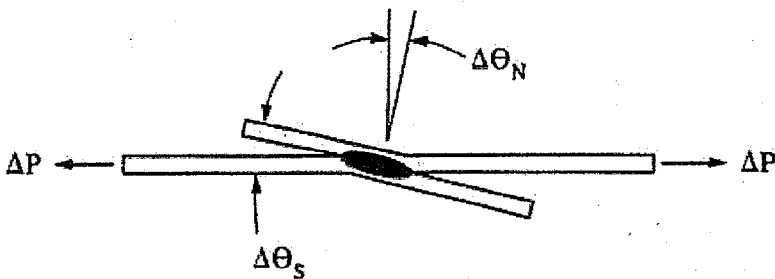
Side view of a spot-weld connection under tensile-shear loading [38]
